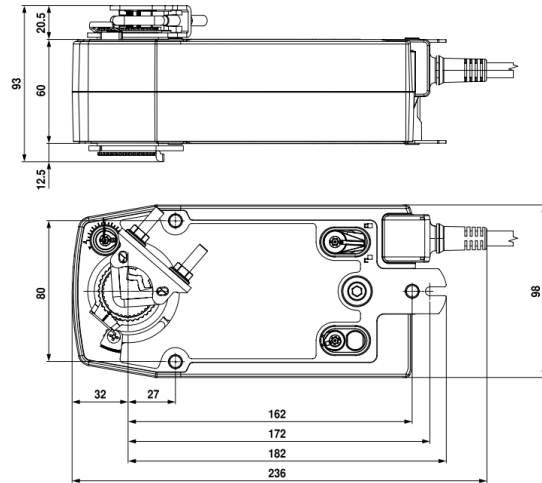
Dimensions of the spring-return type 10Nm actuator
